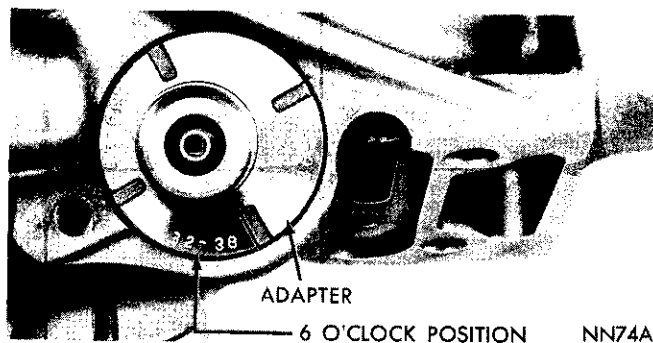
Speedometer Pinion and Adapter—Installed (Retainer Removed for View)
